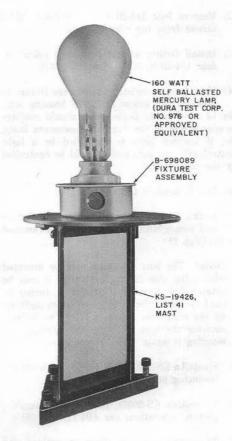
♦Fixture and Lamp—Component of KS-20031
